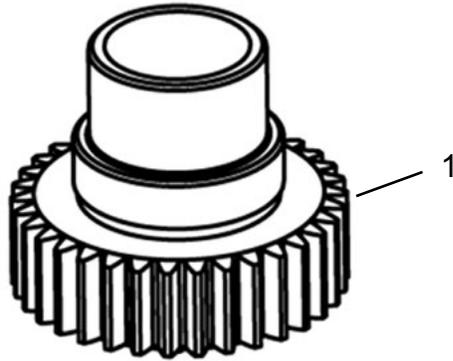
634787PT-XX Spindle Feed Gear - High Speed
